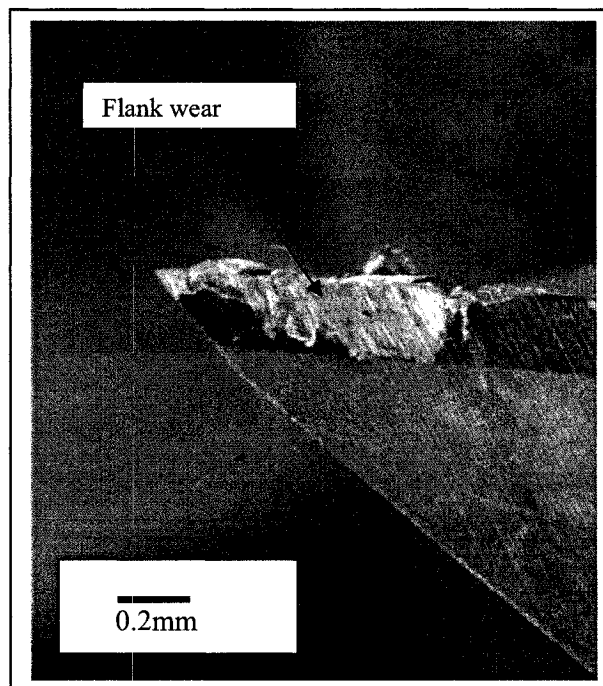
Wear surface, Cutting speed= 50 m/min (836 rpm), depth of cut = 1 mm , feed = 0.025 mm/tooth, stable cut
